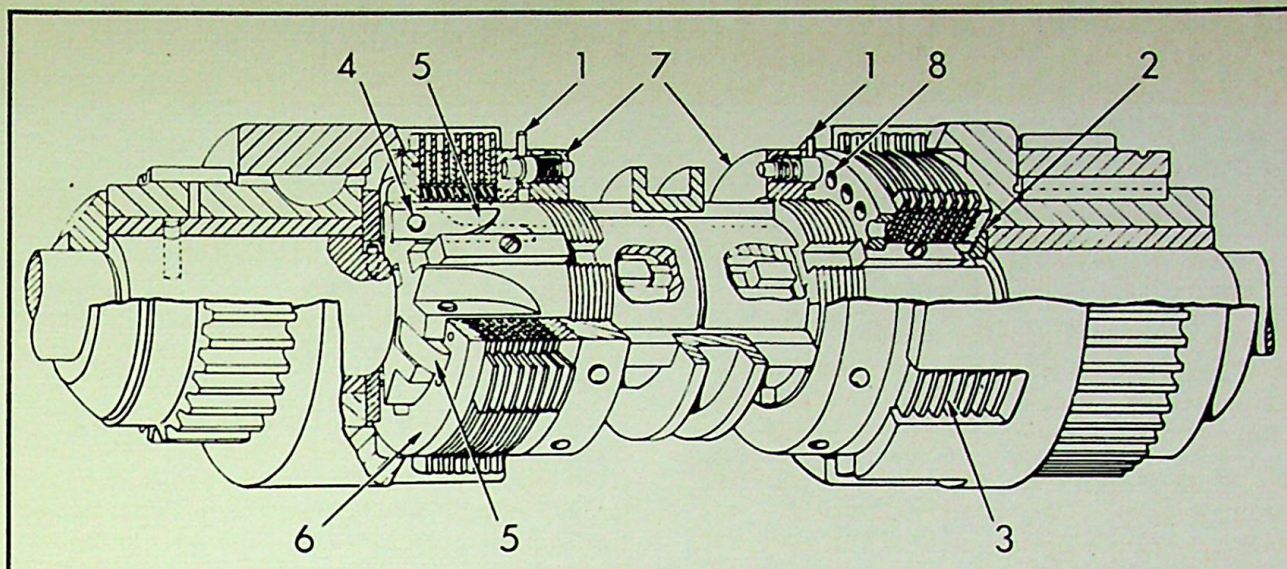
The Twin Disc Clutch for No. 3 Turret Lathes
